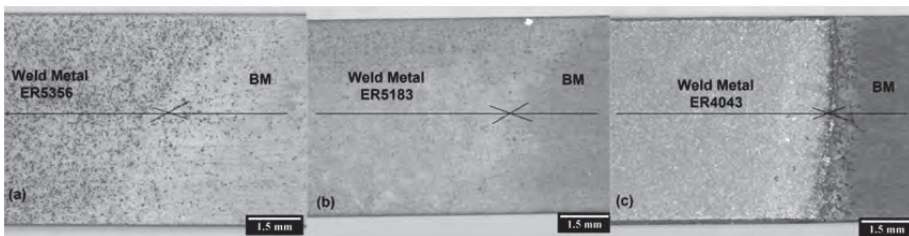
Typical corrosion of welds after free immersion in 3.5% NaCl solution for 60 days: (a) ER5356; (b) ER5183; (c) ER4043 filler wire.
